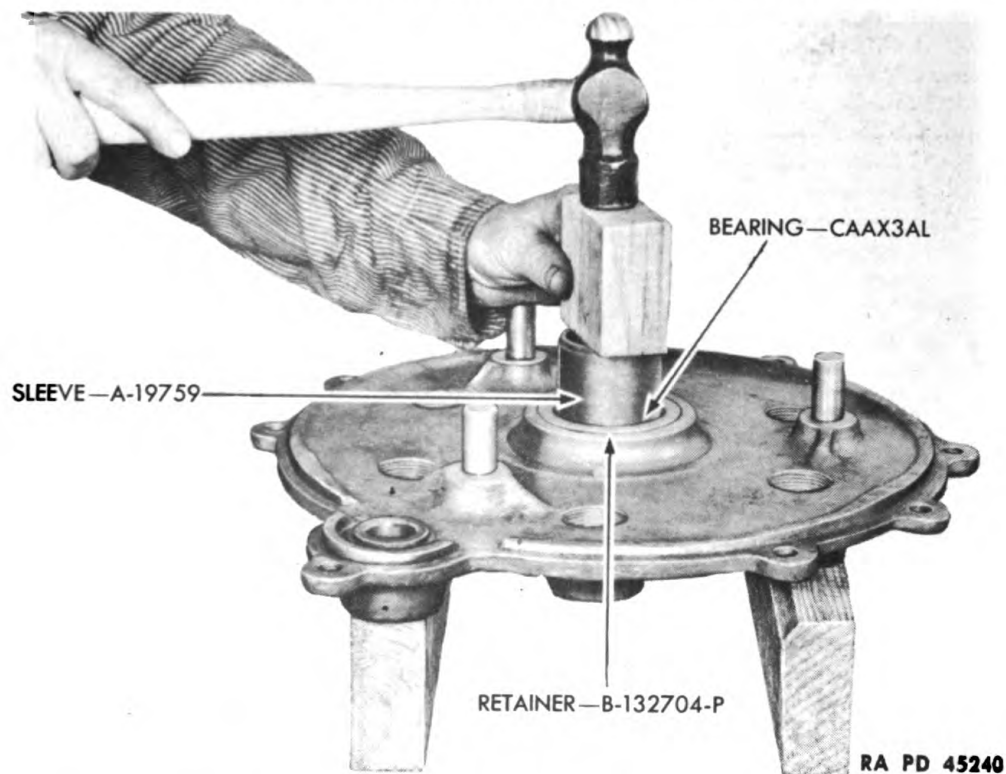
Removing Bearing from Elevating Mechanism Housing Cover
